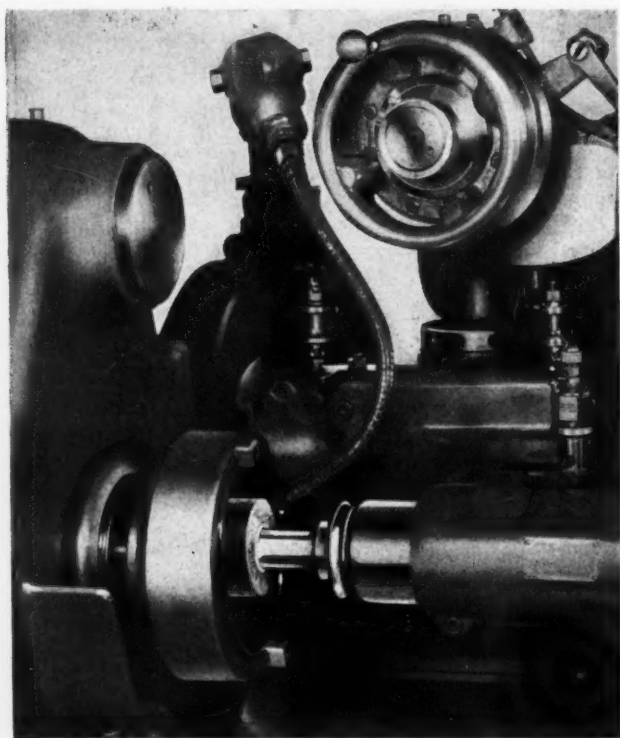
Grinding an Internal Cam on a Hydraulic Universal Machine Equipped with a Cam-grinding Attachment
